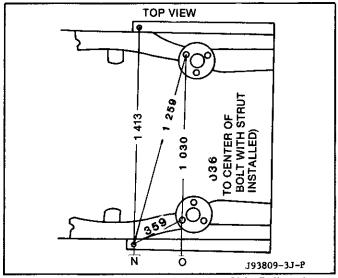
Rear Compartment Upper Side Rail and Suspension Strut Tower Dimensions
